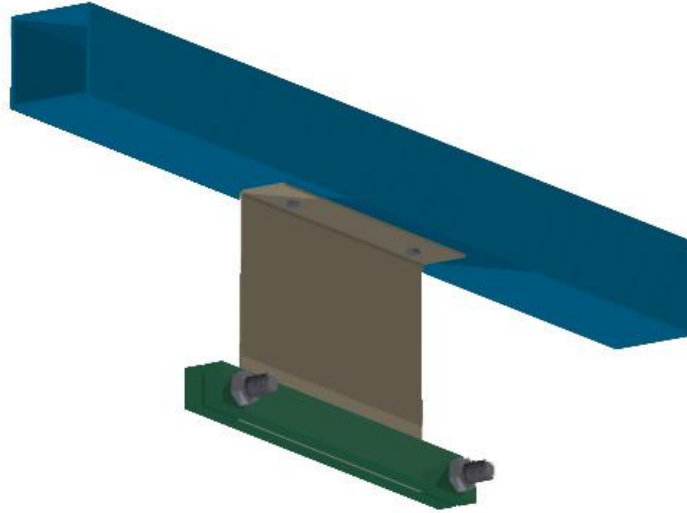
A CAD model displaying the setup of the flange test.
